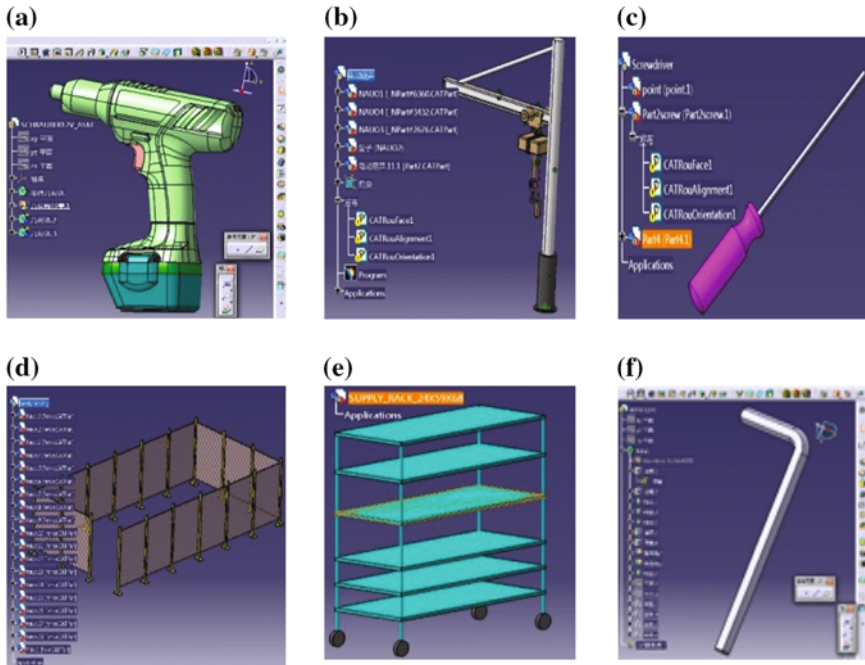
Assembly tool model. a Electric wrench. b Electric block. c Screwdriver. d Guard rail. e Storage rack. f Wrench
